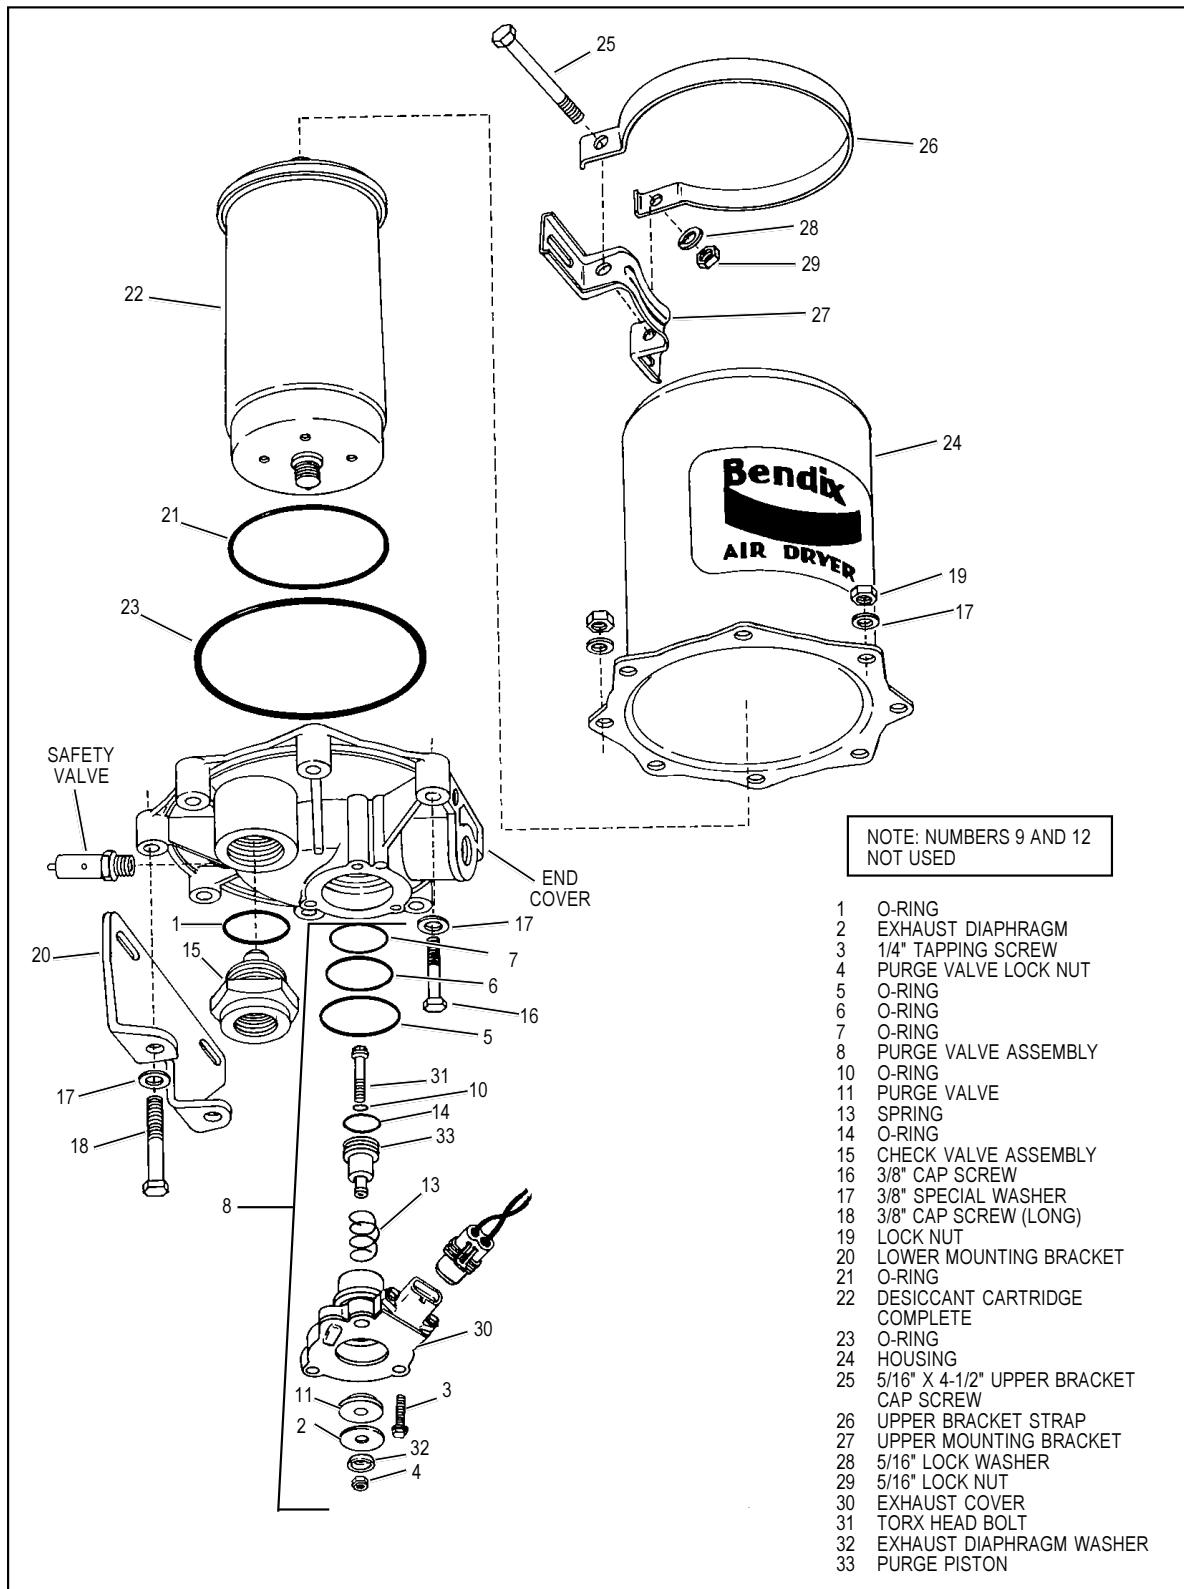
AD-9 AIR DRYER ASSEMBLY
